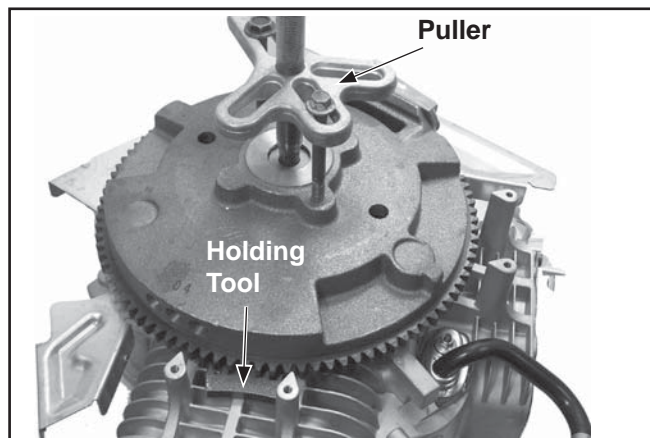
Removing Fan and Flywheel Mounting Hardware.
